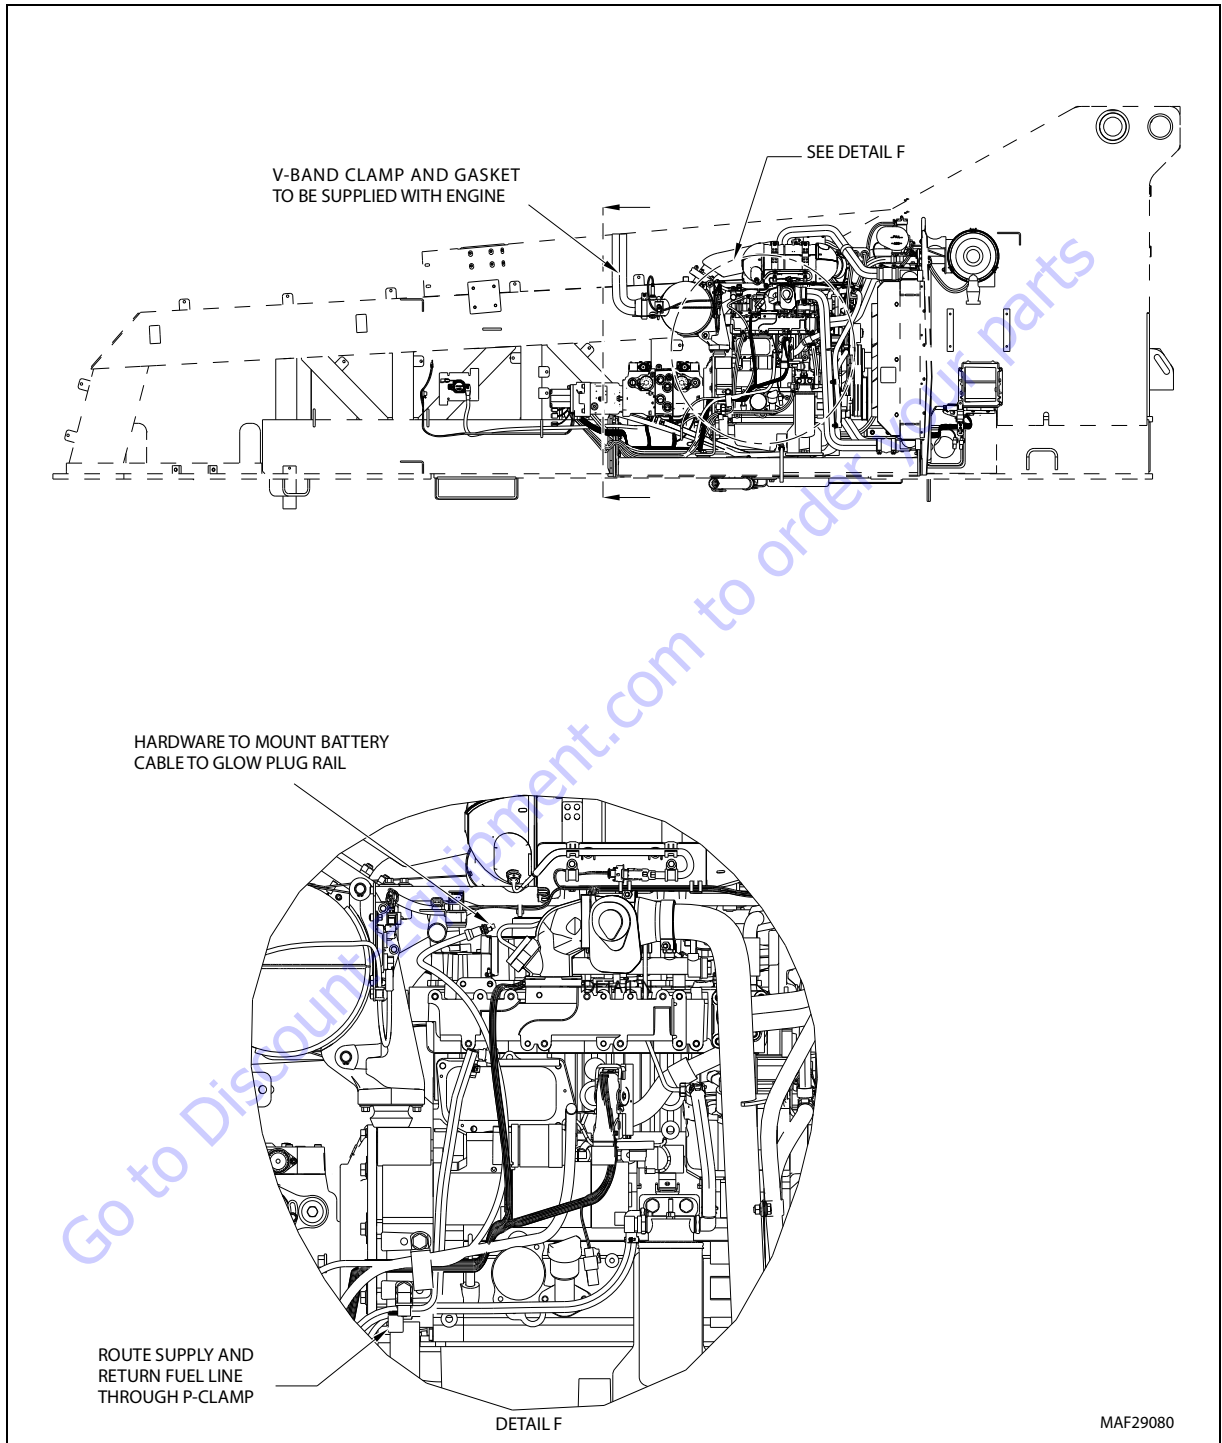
Engine Installation and Diesel Exhaust Fluid (DEF) System (T4F & Stage IV) - Sheet 4 of 6
